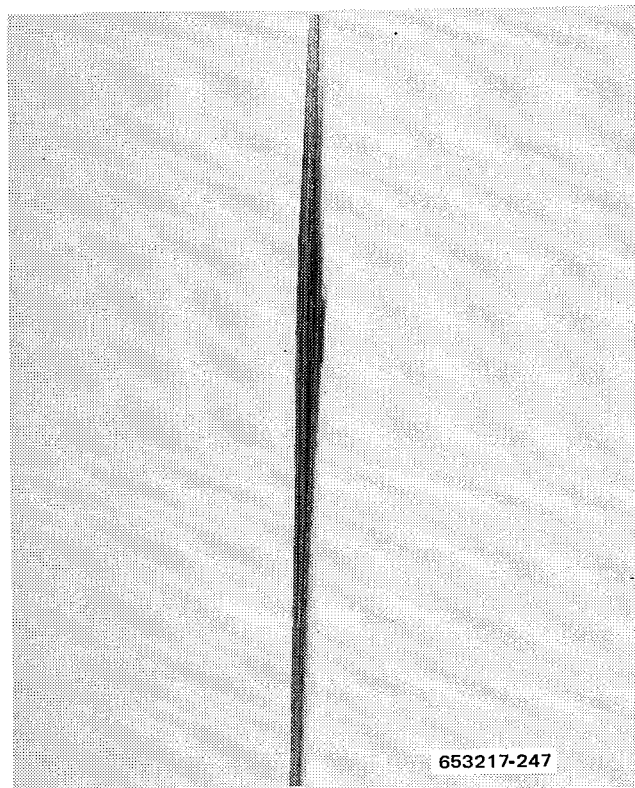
G/E Long-Term Specimen BC92-3 Showing Edge Delaminations in Heated Zone. (Specimen had failed at opposite heated zone after 4053-hr of exposure)
